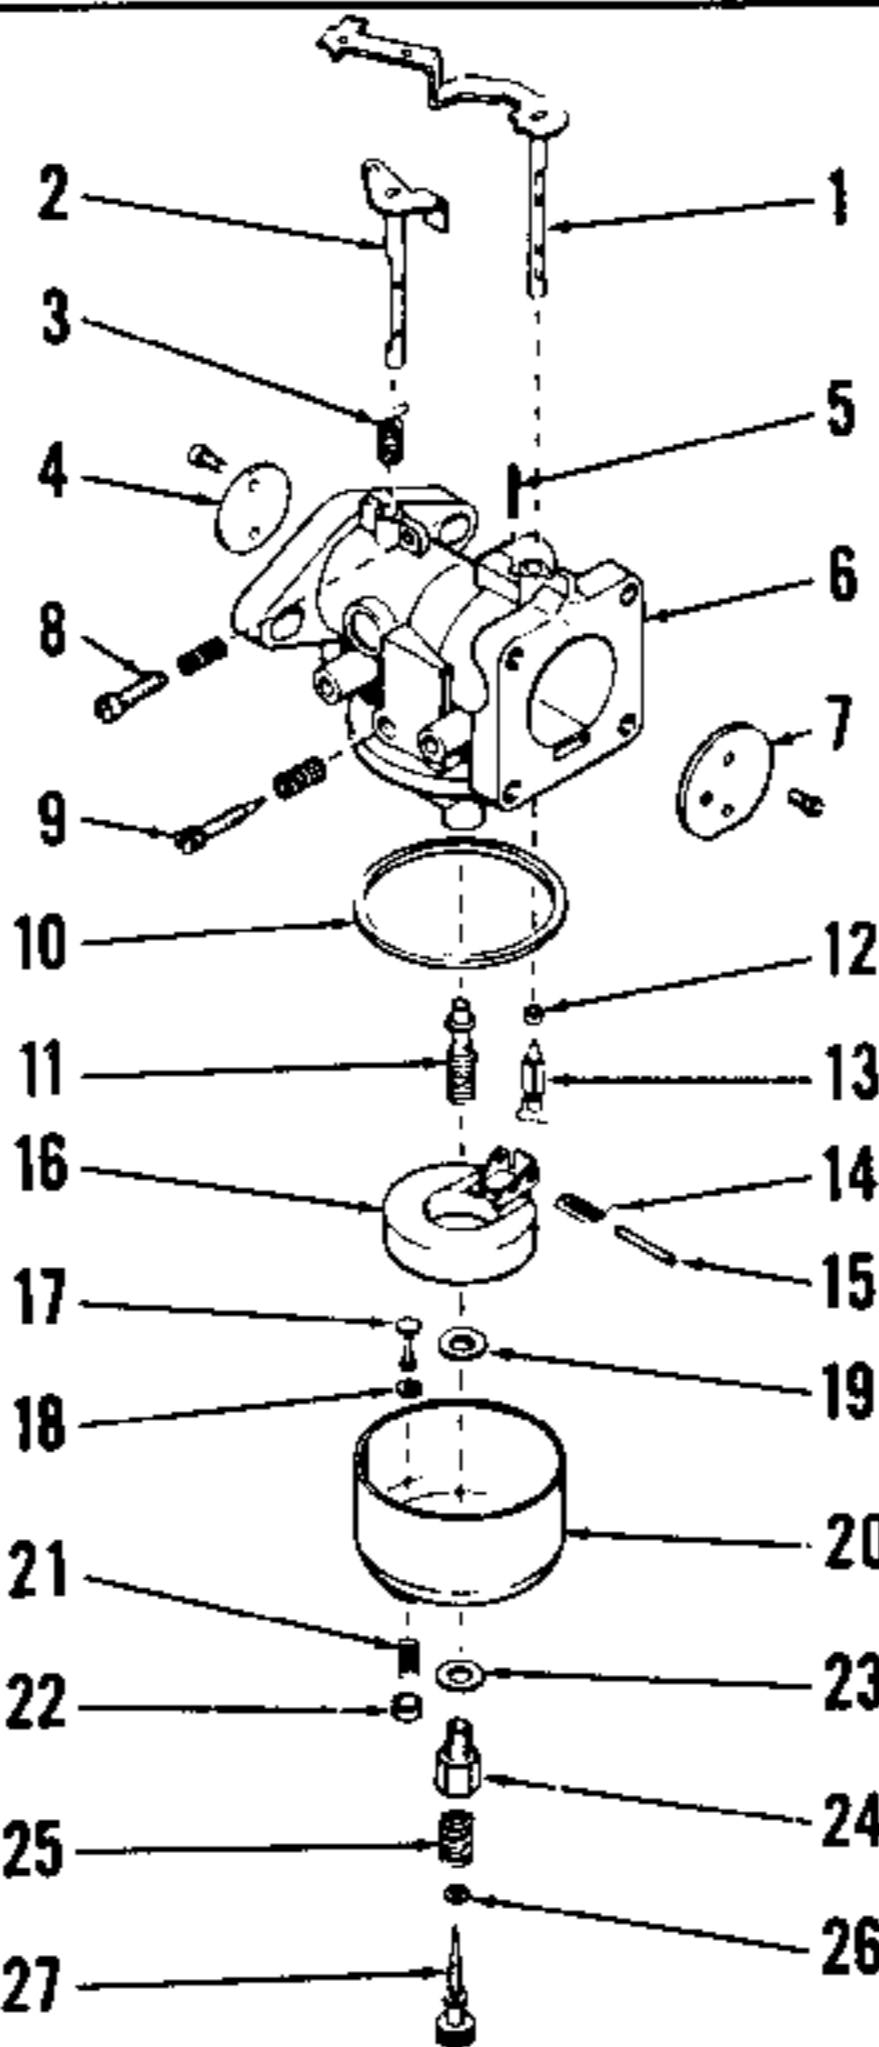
Exploded view of typical Walbro carburetor used on all models.
